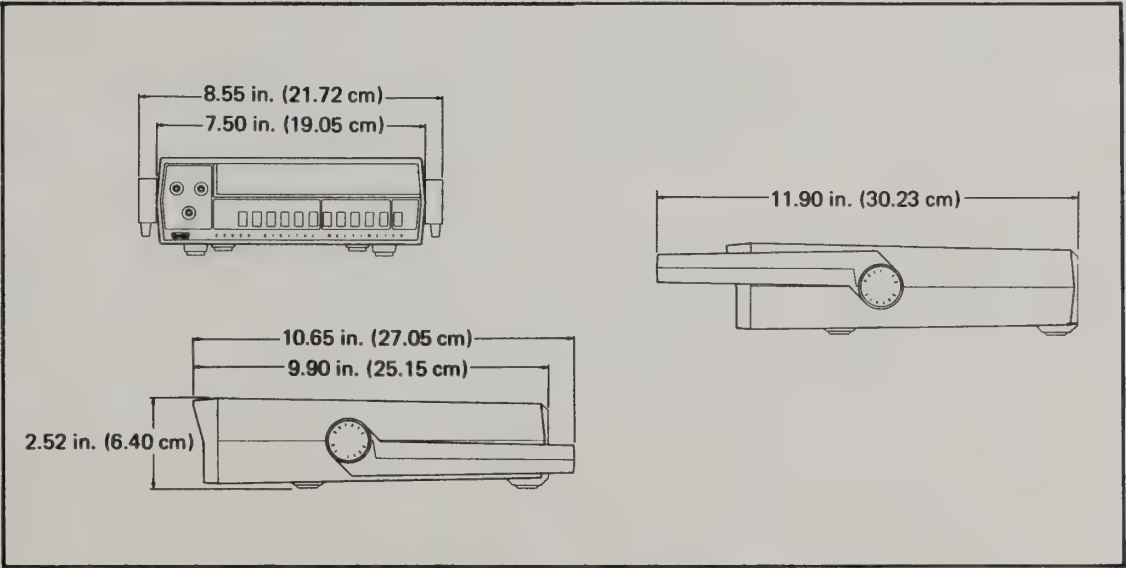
MODEL 8000A OUTLINE DRAWING.
